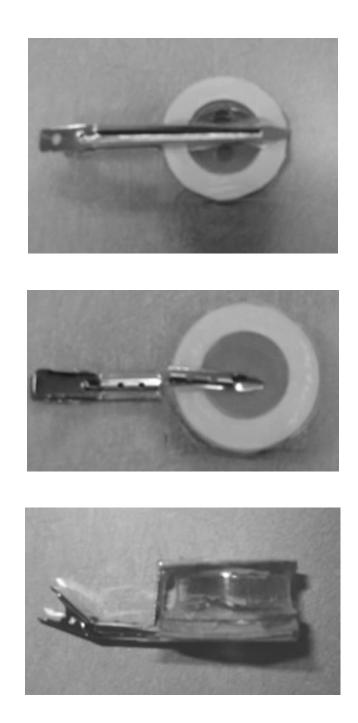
Pictures of clip cage design showing top, bottom and side views.
